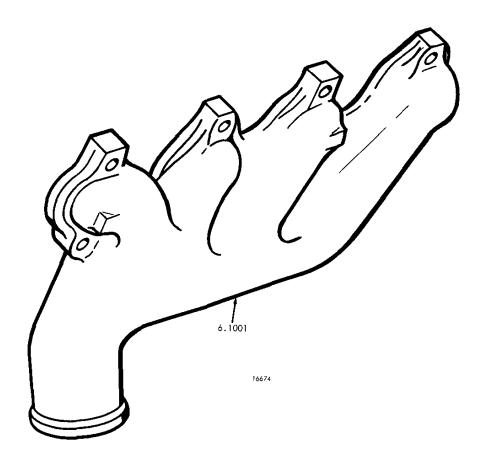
C EXHAUST MANIFOLD (end outlet, right & left bank)
